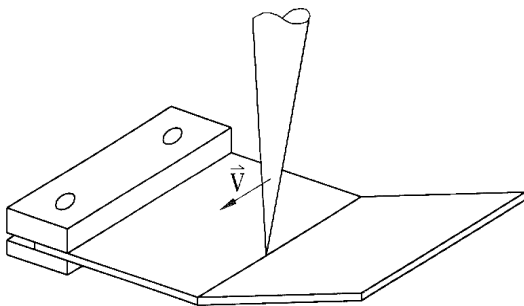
Schematic of laser bending by the TG mechanism (ref. 8)
